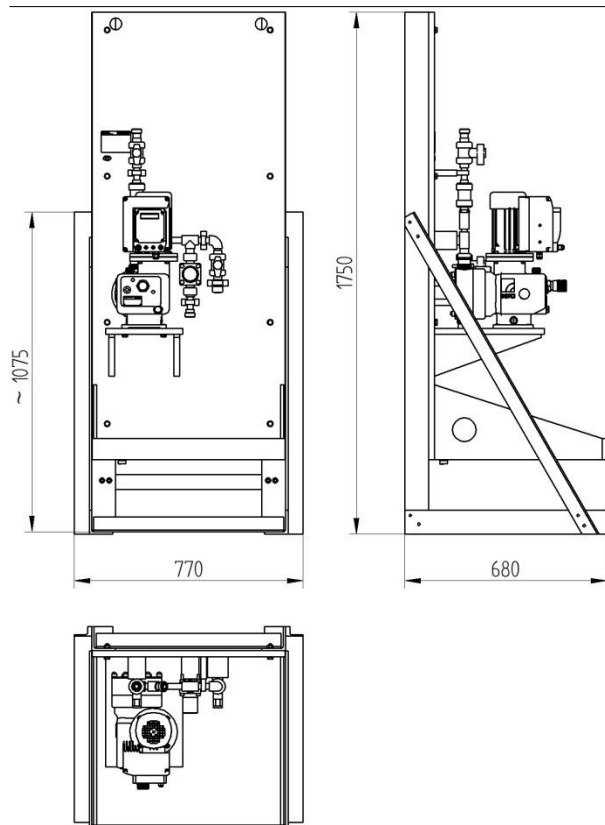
Dimensions of the CVD1 (floor mounting, GFK stand)
